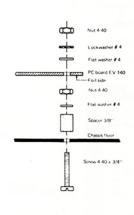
Mounting of the amplifier PC boards onto the chassis
